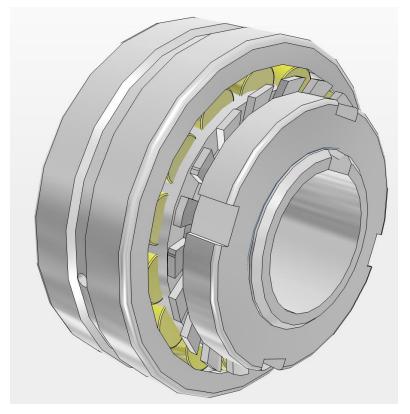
22205 EK bearing + H 305 adapter sleeve
